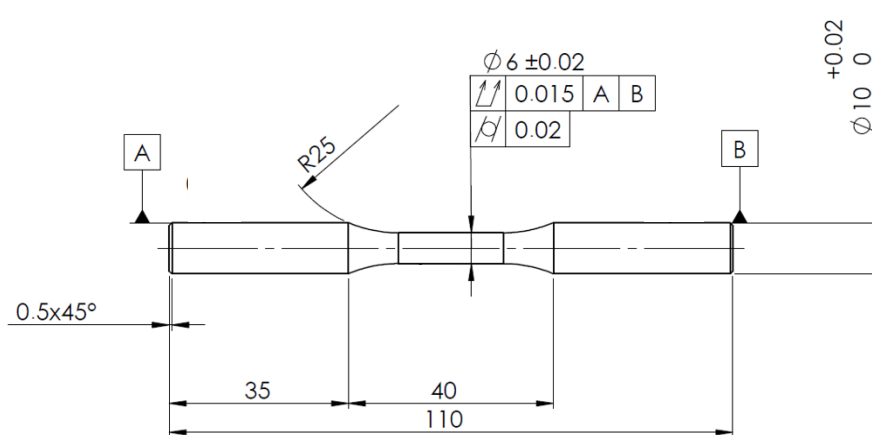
Sample geometry in agreement with ISO 1143 Standard⁴¹ (all dimensions in mm)
